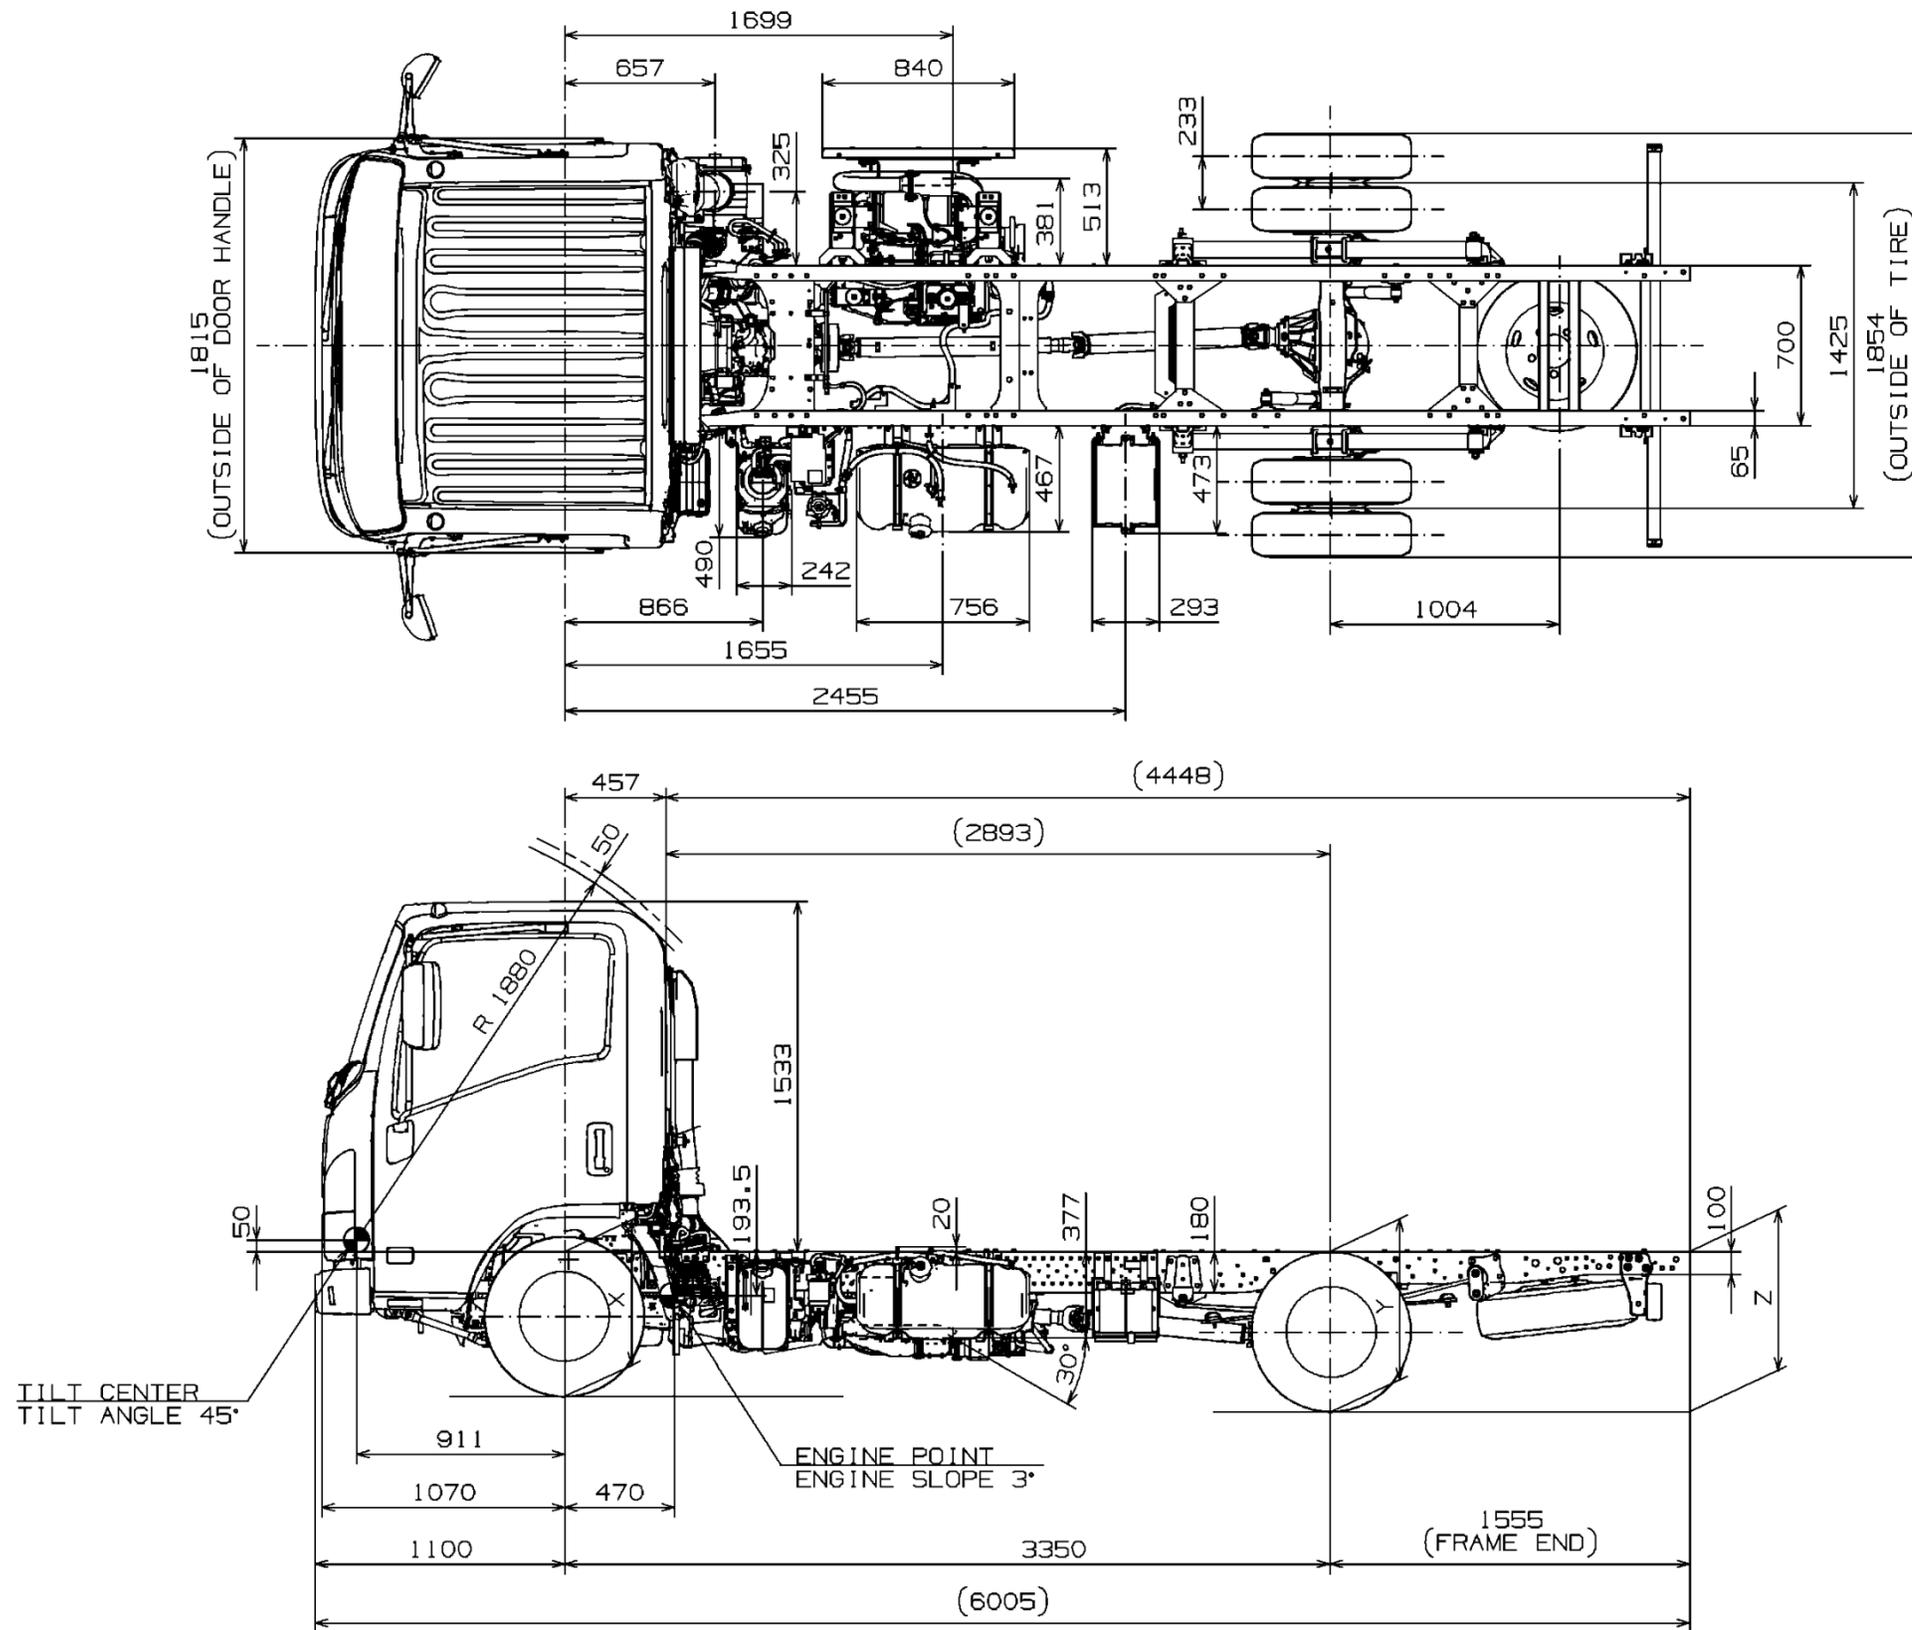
Cab Chassis Drawing NMR85L/U-HH5AYE
